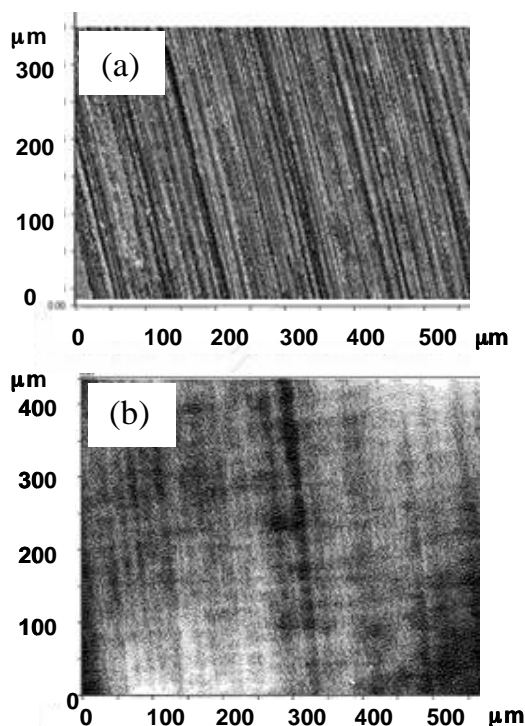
Optical photographs of cBN and diamond machined Be0.9%Cu surfaces produced from ECAE grain refined alloy. (a) Surface machined with cBN tool, surface roughness 152 nm rms. (b) Surface machined with diamond tool, surface roughness 18 nm rms.
